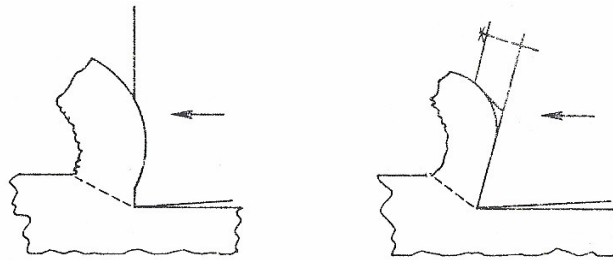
Using the groove (left) and obstruction type (right) chip breakers [19]
